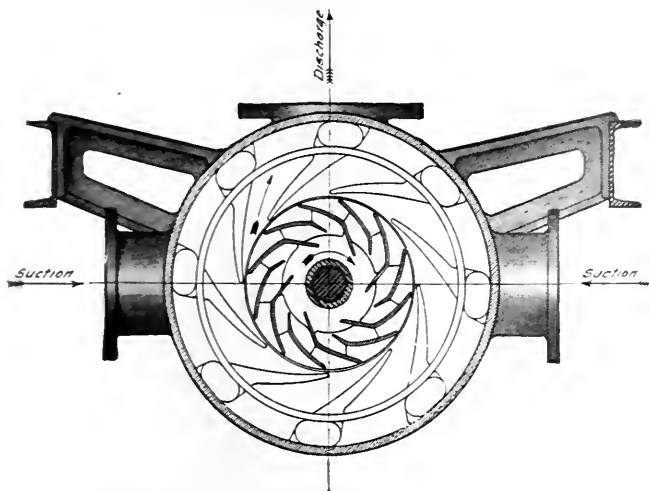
SECTIONAL VIEW OF ONE STAGE OF PUMP SHOWING IMPELLER AND DIFFUSION VANES
